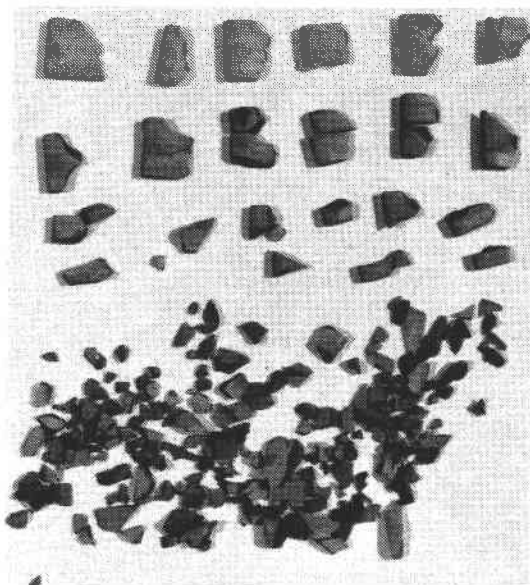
Fractographs of fractures in gasifier inner backplate shown in previous figure.
